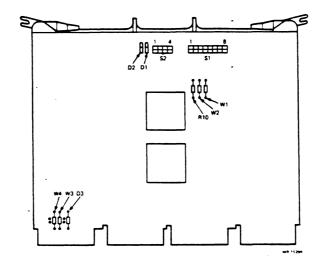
MSV11-JB/JC LED/SWITCH PACK/JUMPER LAYOUT
